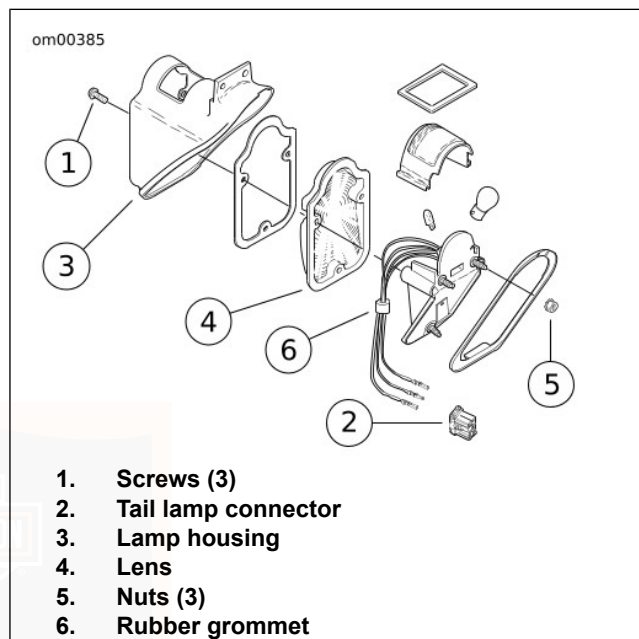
Tail Lamp Assembly: FLSTSC/FLSTN
